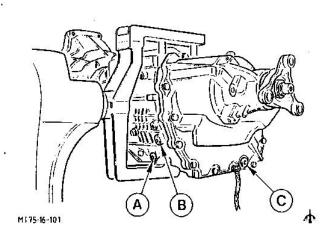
A - Transmission oil drain plug 8 - Transfer box oil filler plug C - Transfer box oil drain plug
